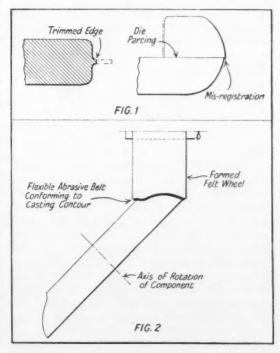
(Top) Grinding of die-castings is only required when there is a heavy flash-root or a marked mis-registration.
